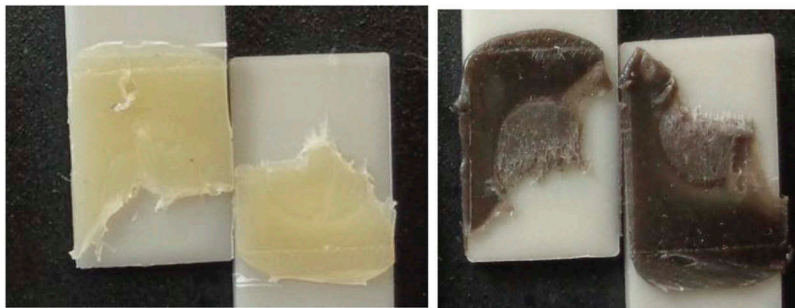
shows the fracture surfaces of the pristine adhesives after the ageing cycles A, B and C. Visual inspections of the fractured specimens display that the fracture surfaces of the pristine HMA do not change for the cycle B and C. The failure surfaces found in this study were similar to the ones obtained in.<sup>[7,8,23,27]</sup> On the other hand, the cycle A causes a decrease of the cohesive fracture zone. Furthermore, it can be noted that the colour of the adhesive changes during the cycle A. This could be due to the oxidation of the adhesive that as will be shown in the ATR-FTIR section. For this reason, the resistant section of the adhesive decreases and consequently the maximum sustained load. This behaviour is more evident in Figure 7, especially for the HMA\_5% where it is clear that the only part that has a cohesive failure is limited to the nearly circular zone in the centre of the adhesive layer.
